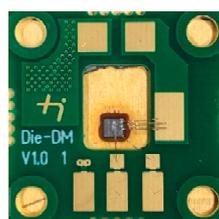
Sintered bare die MOSFET on ENIG metallized copper plate with FR4 adapter PCB holding the probing pads for ATIM and Al wire bonds to the MOSFET top contacts.
